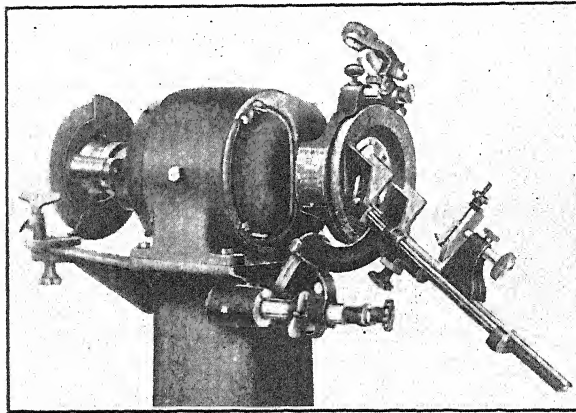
The Covel Manufacturing Co. "New Yankee" Motorized Grinder.
